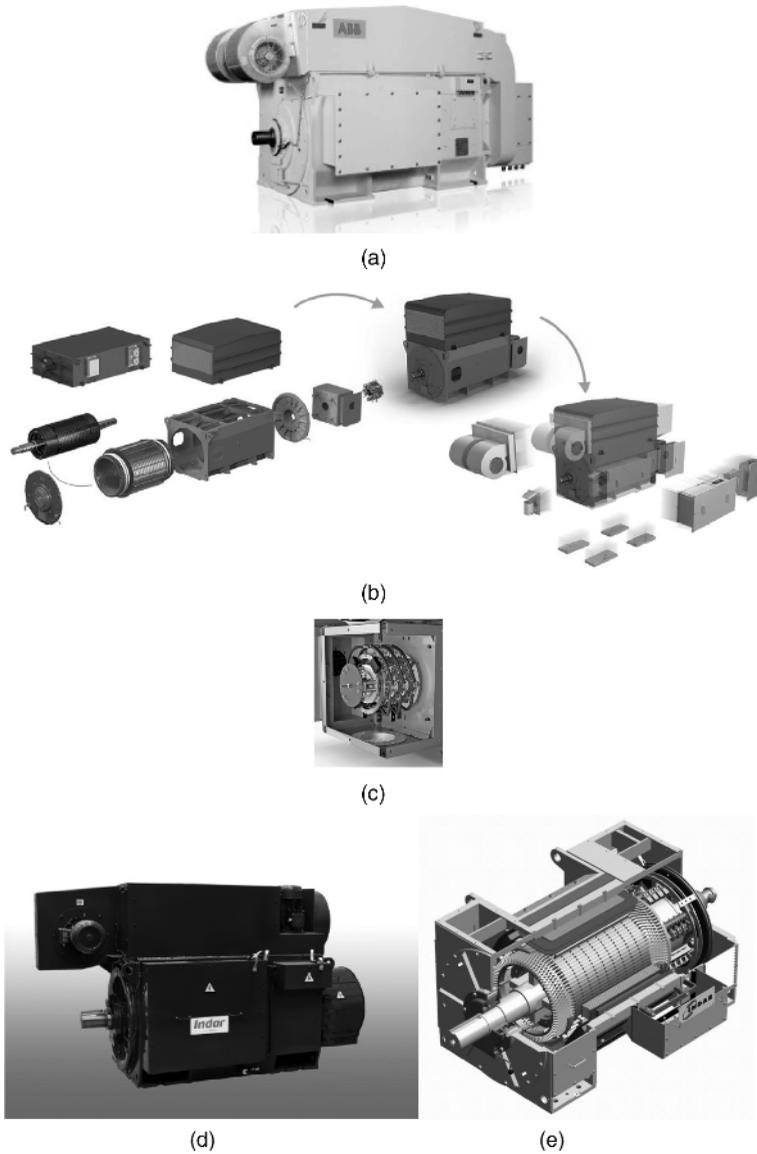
(a) Picture of the machine; (b) CAD representation of DFIM components; (c) slip rings (source ABB); (d) picture of the machine; and (e) CAD representation. (Source: Indar-Ingeteam.)
